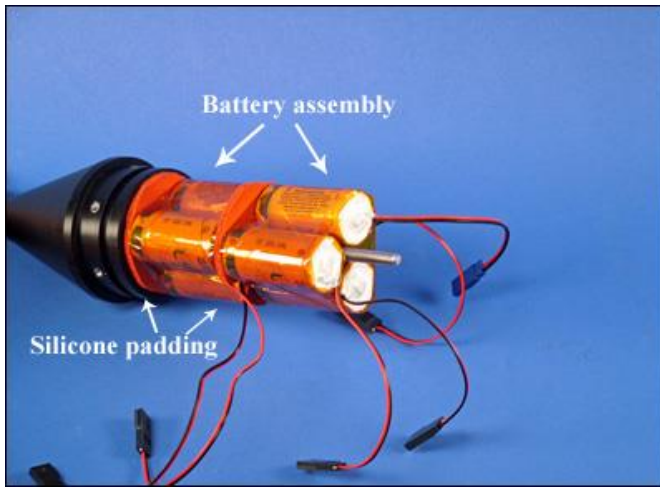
Lock nut, polycarbonate plate and silicone pad removed. Batteries ready to be removed from nose cone assembly.
